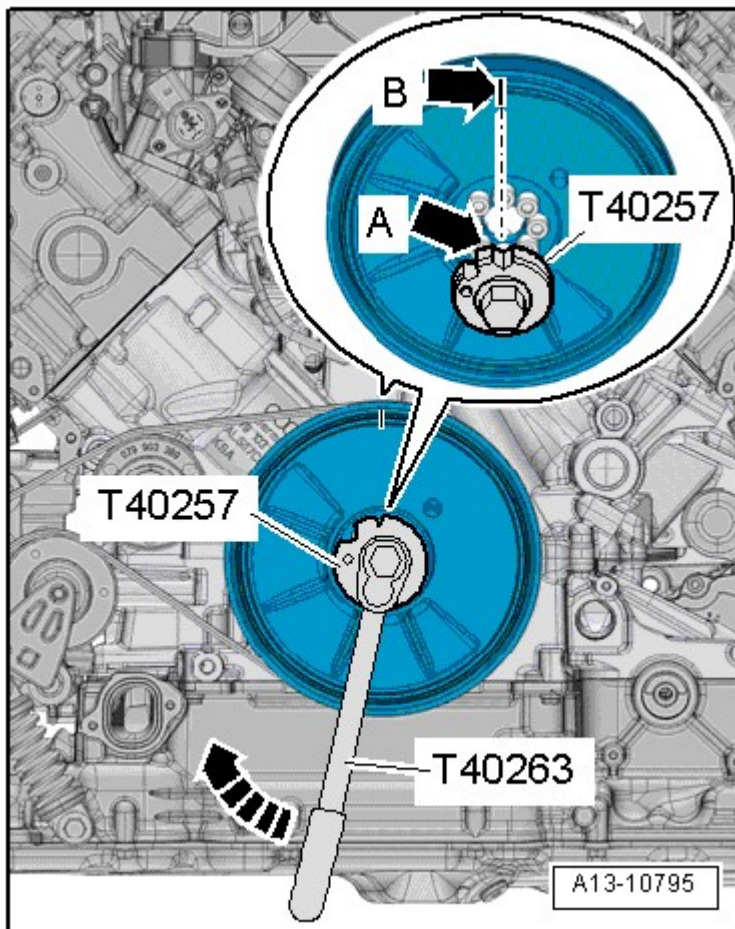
Turning Crankshaft 180 Degrees In Direction Of Engine Rotation -Arrow
